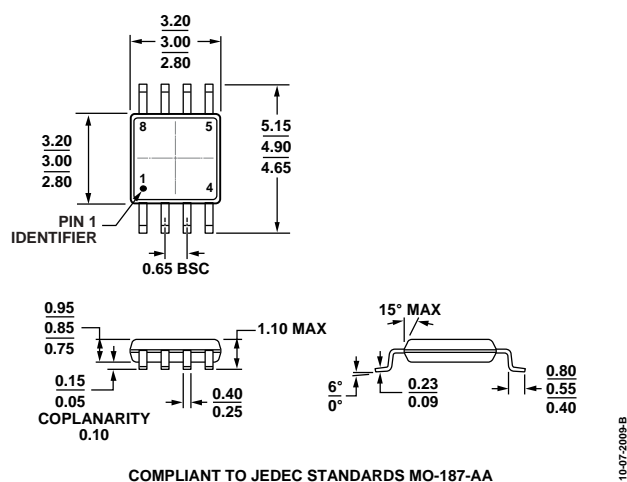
8-Lead Mini Small Outline Package [MSOP] (RM-8). Dimensions shown in millimeters
